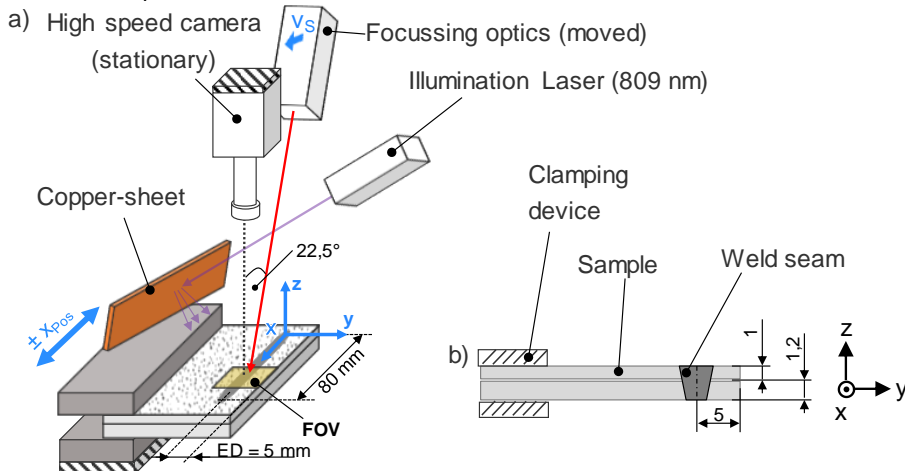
(a) Sketch of experimental setup; (b) geometrical dimensions of the sample
